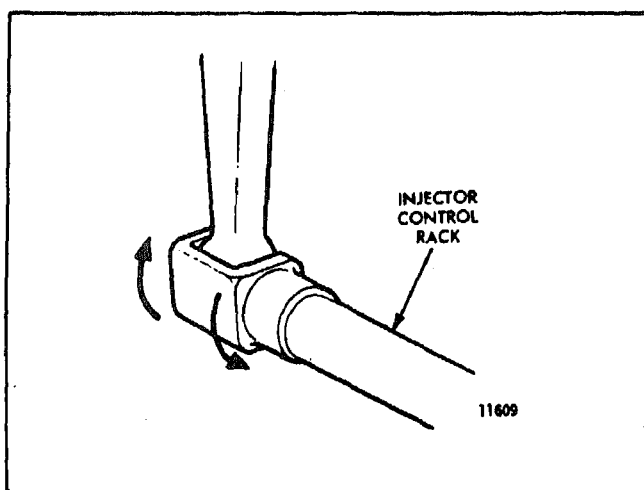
Checking Rotating Movement of Injector Control Rack
